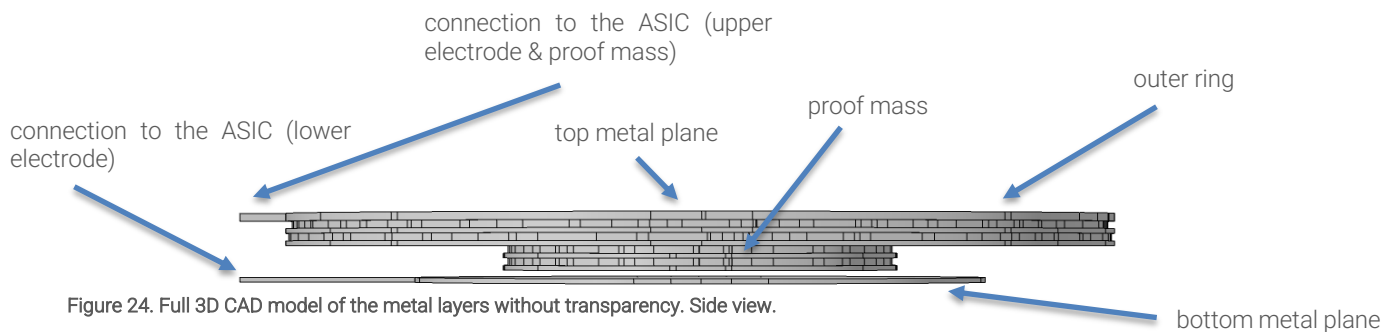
Full 3D CAD model of the metal layers without transparency. Side view.
